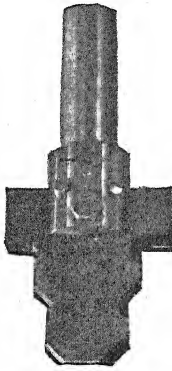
A Stepped Combination Boring Tool Tipped with Carbide.
